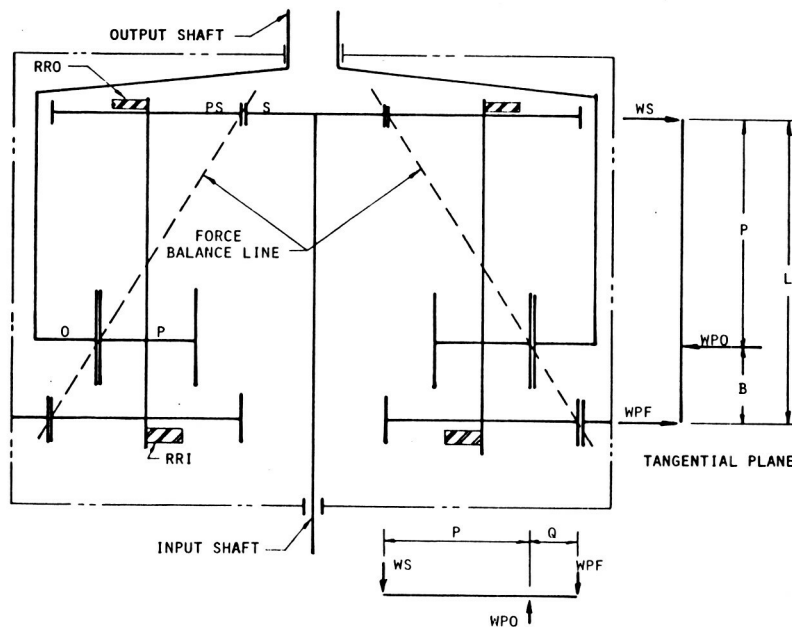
Schematic arrangement of self-aligning, bearingless, planetary gear - tangential plane.
